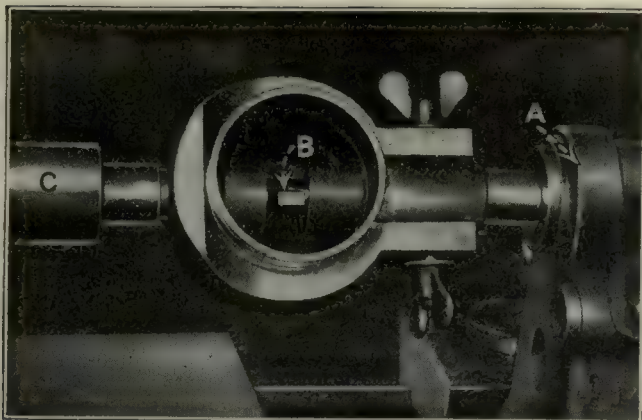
FACING INNER ENDS OF PISTON-PIN HOLES
